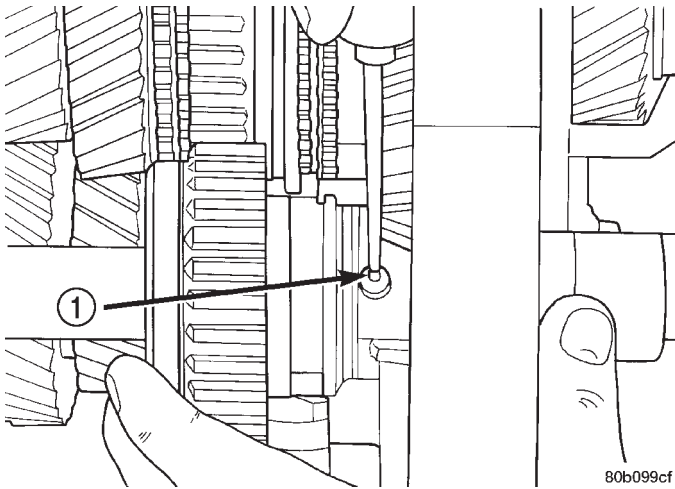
Depress Pin In Reverse Idler Gear Shaft
